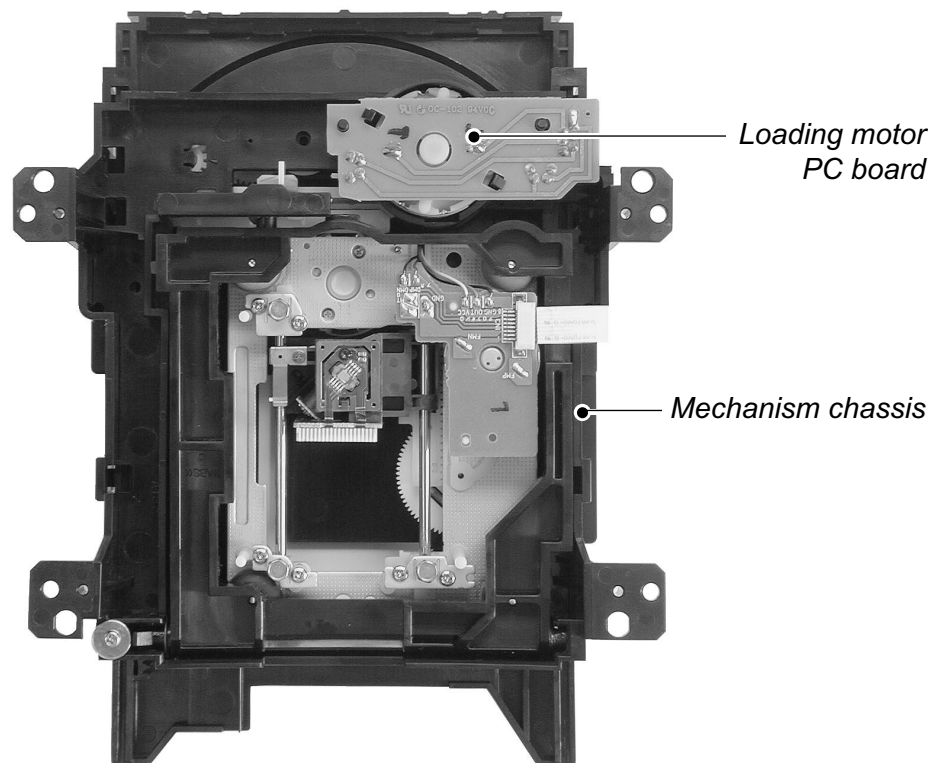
Mechanism chassis assembly (Bottom side)
